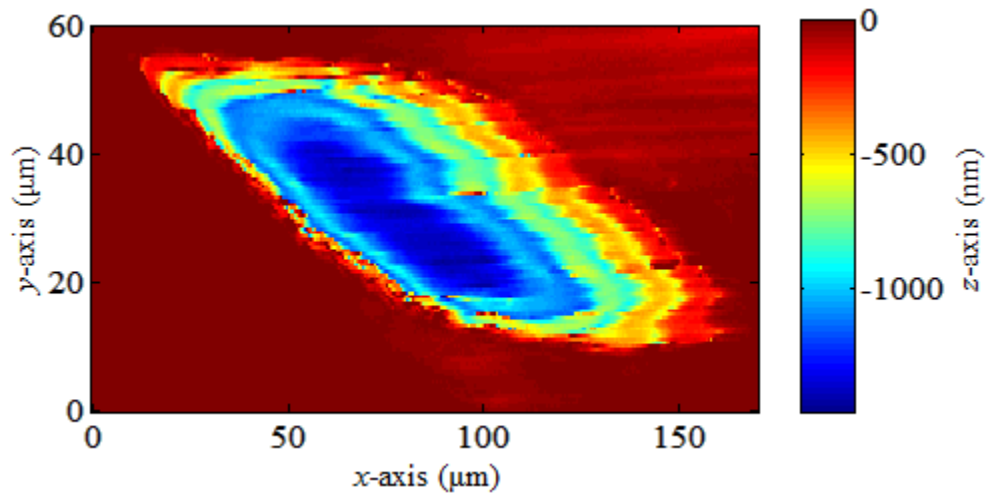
Footprint machined over 30 minutes using high-power facility. A 1st mode, 270 Hz probe was utilized making contact with the workpiece surface. Volumetric removal rate is approximately $6126 \mu\text{m}\cdot\text{hr}^{-1}$.
